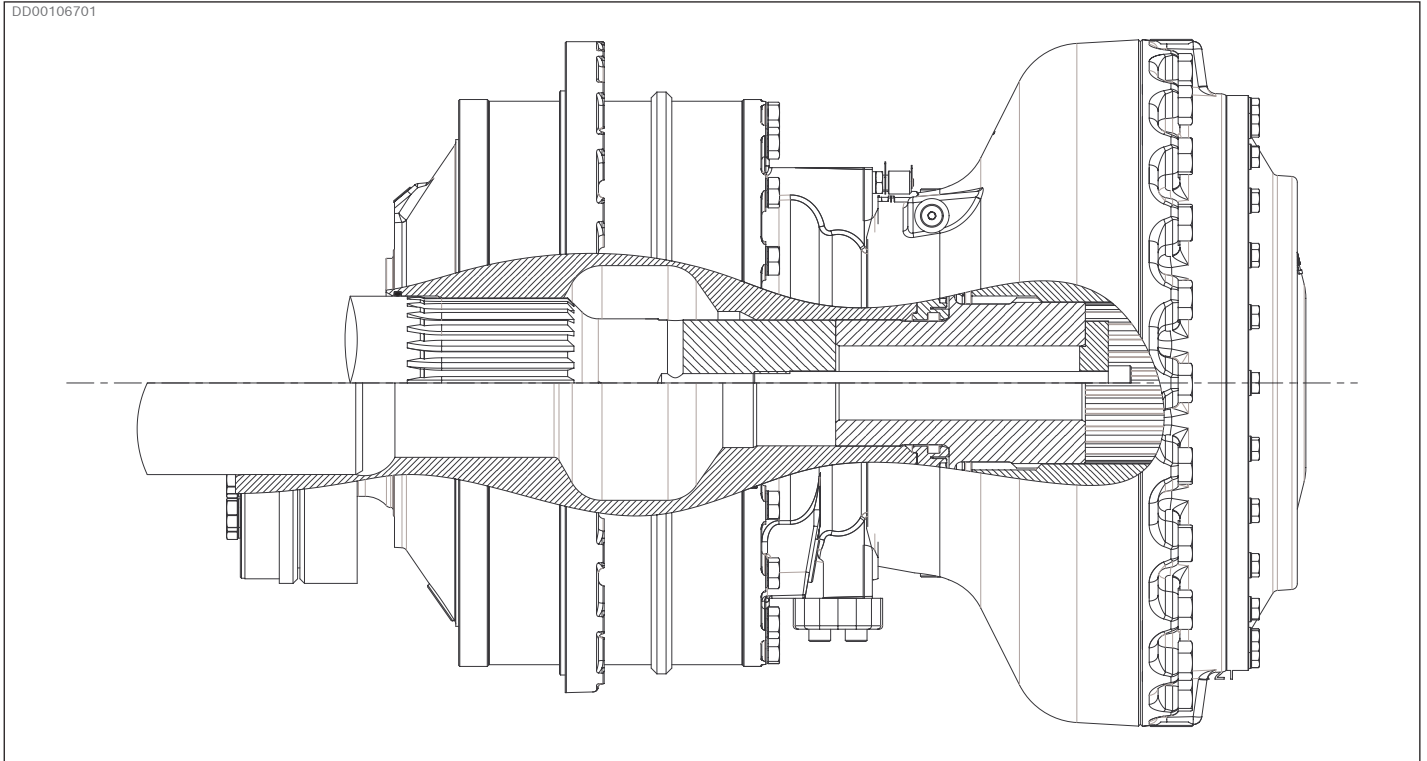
Tandem mounting of CA motor and MDA 14 brake
